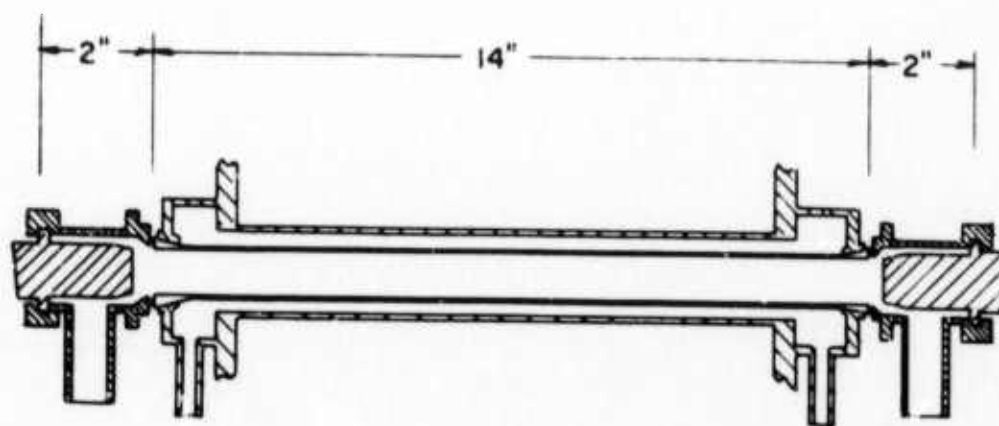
Cutaway View of Actual Water-Jacketed Laser Cell Demonstrating Cell Assembly
